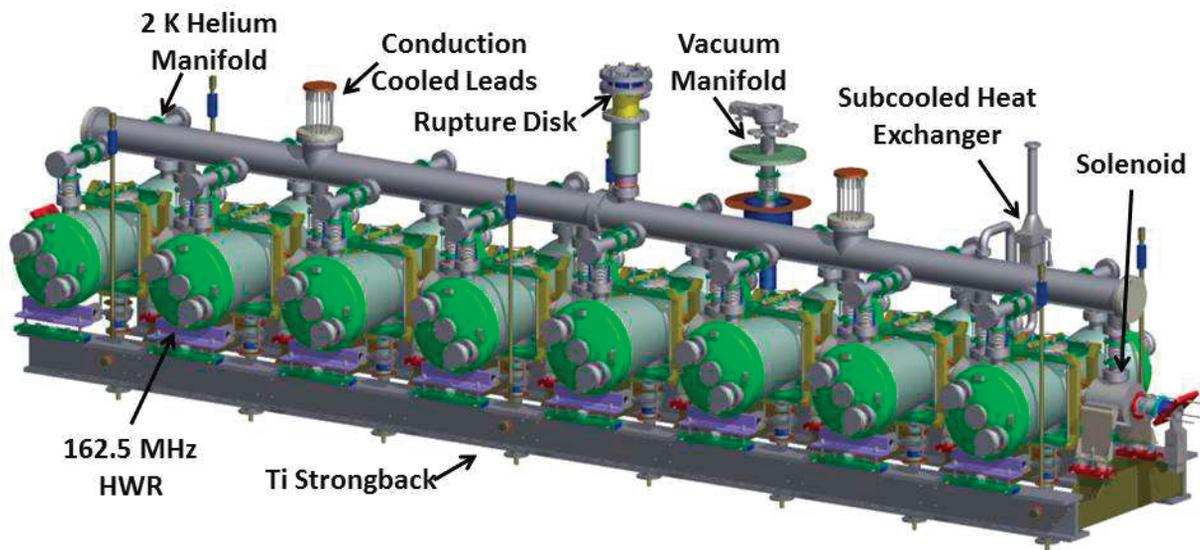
The cryomodule beam-line assembly. The clean cavity vacuum manifold is behind the assembly but the lid penetration is visible behind the helium manifold. The assembly as shown is 5.9 meters long. The cryomodule still remains to be designed but initial estimates give a width and a height of 1.7 m and 2.0 m respectively.
